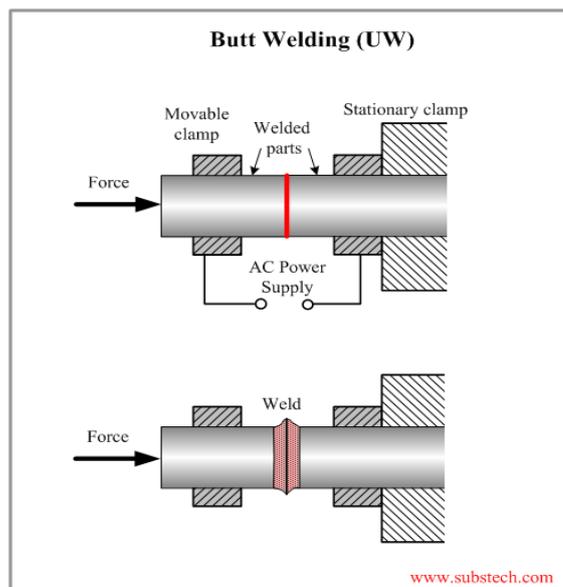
Flush Butt Welding Technology²⁰
